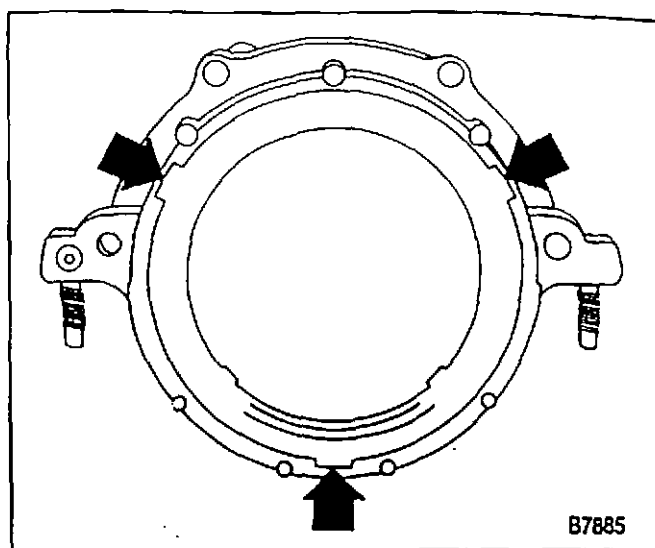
Seal Removal Notches (5.0 and 5.7L Engines)
